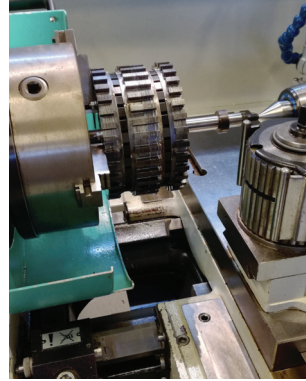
Assembly of the PM blocks in one of the rotor stacks.
